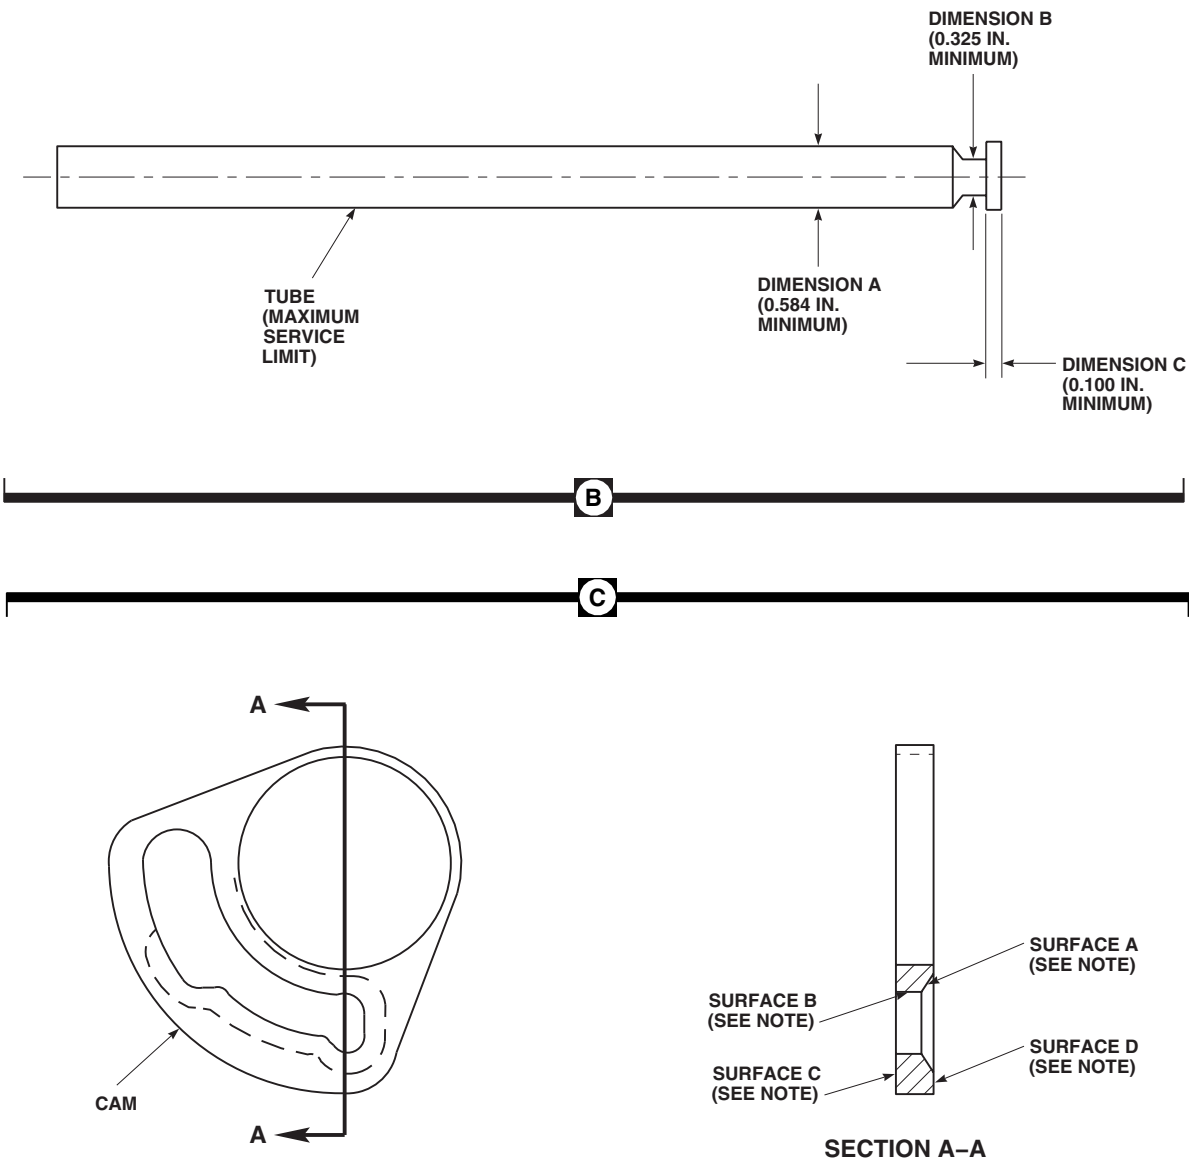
REPLACE COPILOT’S COLLECTIVE STICK TUBE ASSEMBLY
